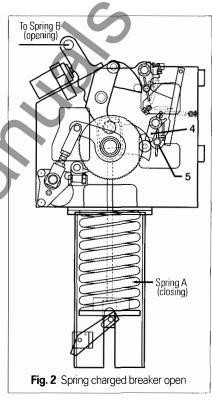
shows the mechanism with Spring A charged and the breaker in the open position. The close latch (4) supports the closing spring's stored energy. To close the breaker, the close release latch (5) is rotated, releasing the close latch and allowing Spring A to discharge.
